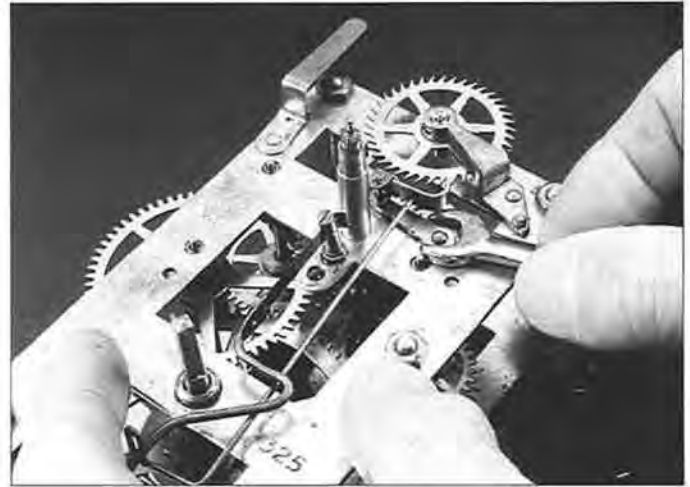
Make escapement adjustments here. It's easier than when mounted in the case.
